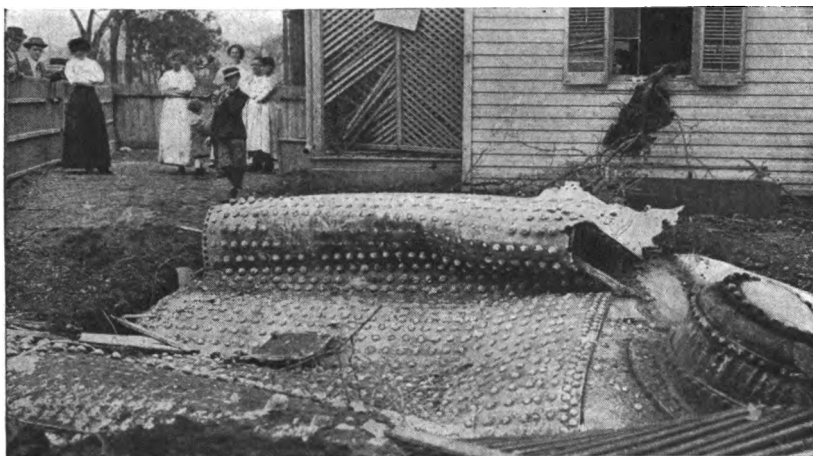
WRAPPER SHEET AND DOME IN DOOR YARD.
